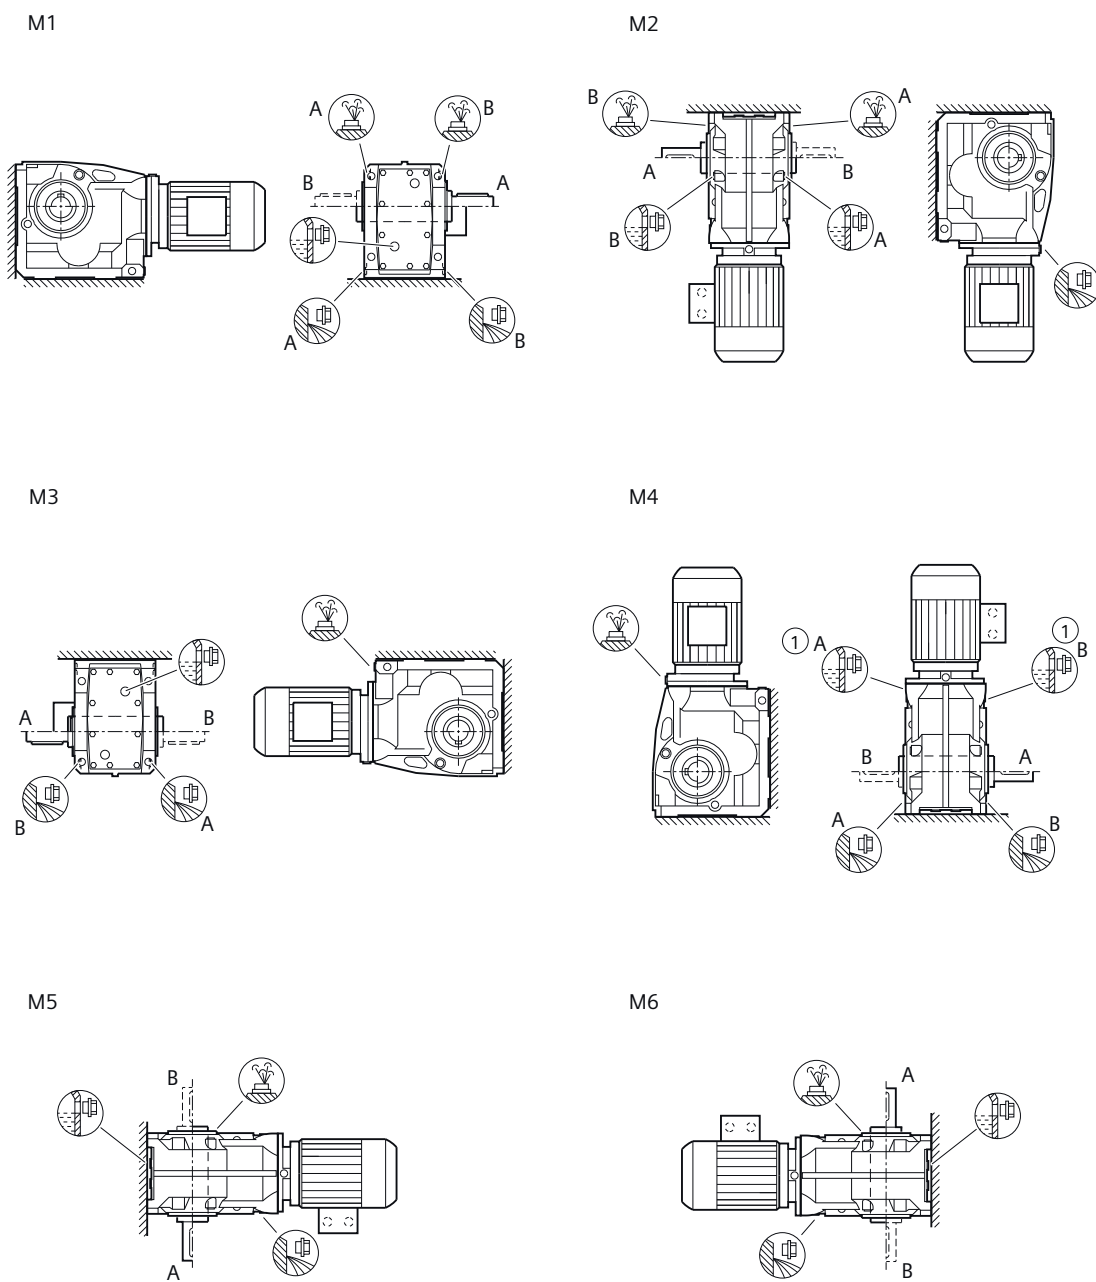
Mounting positions for bevel gearbox K. foot-mounted design, sizes 39 - 189
